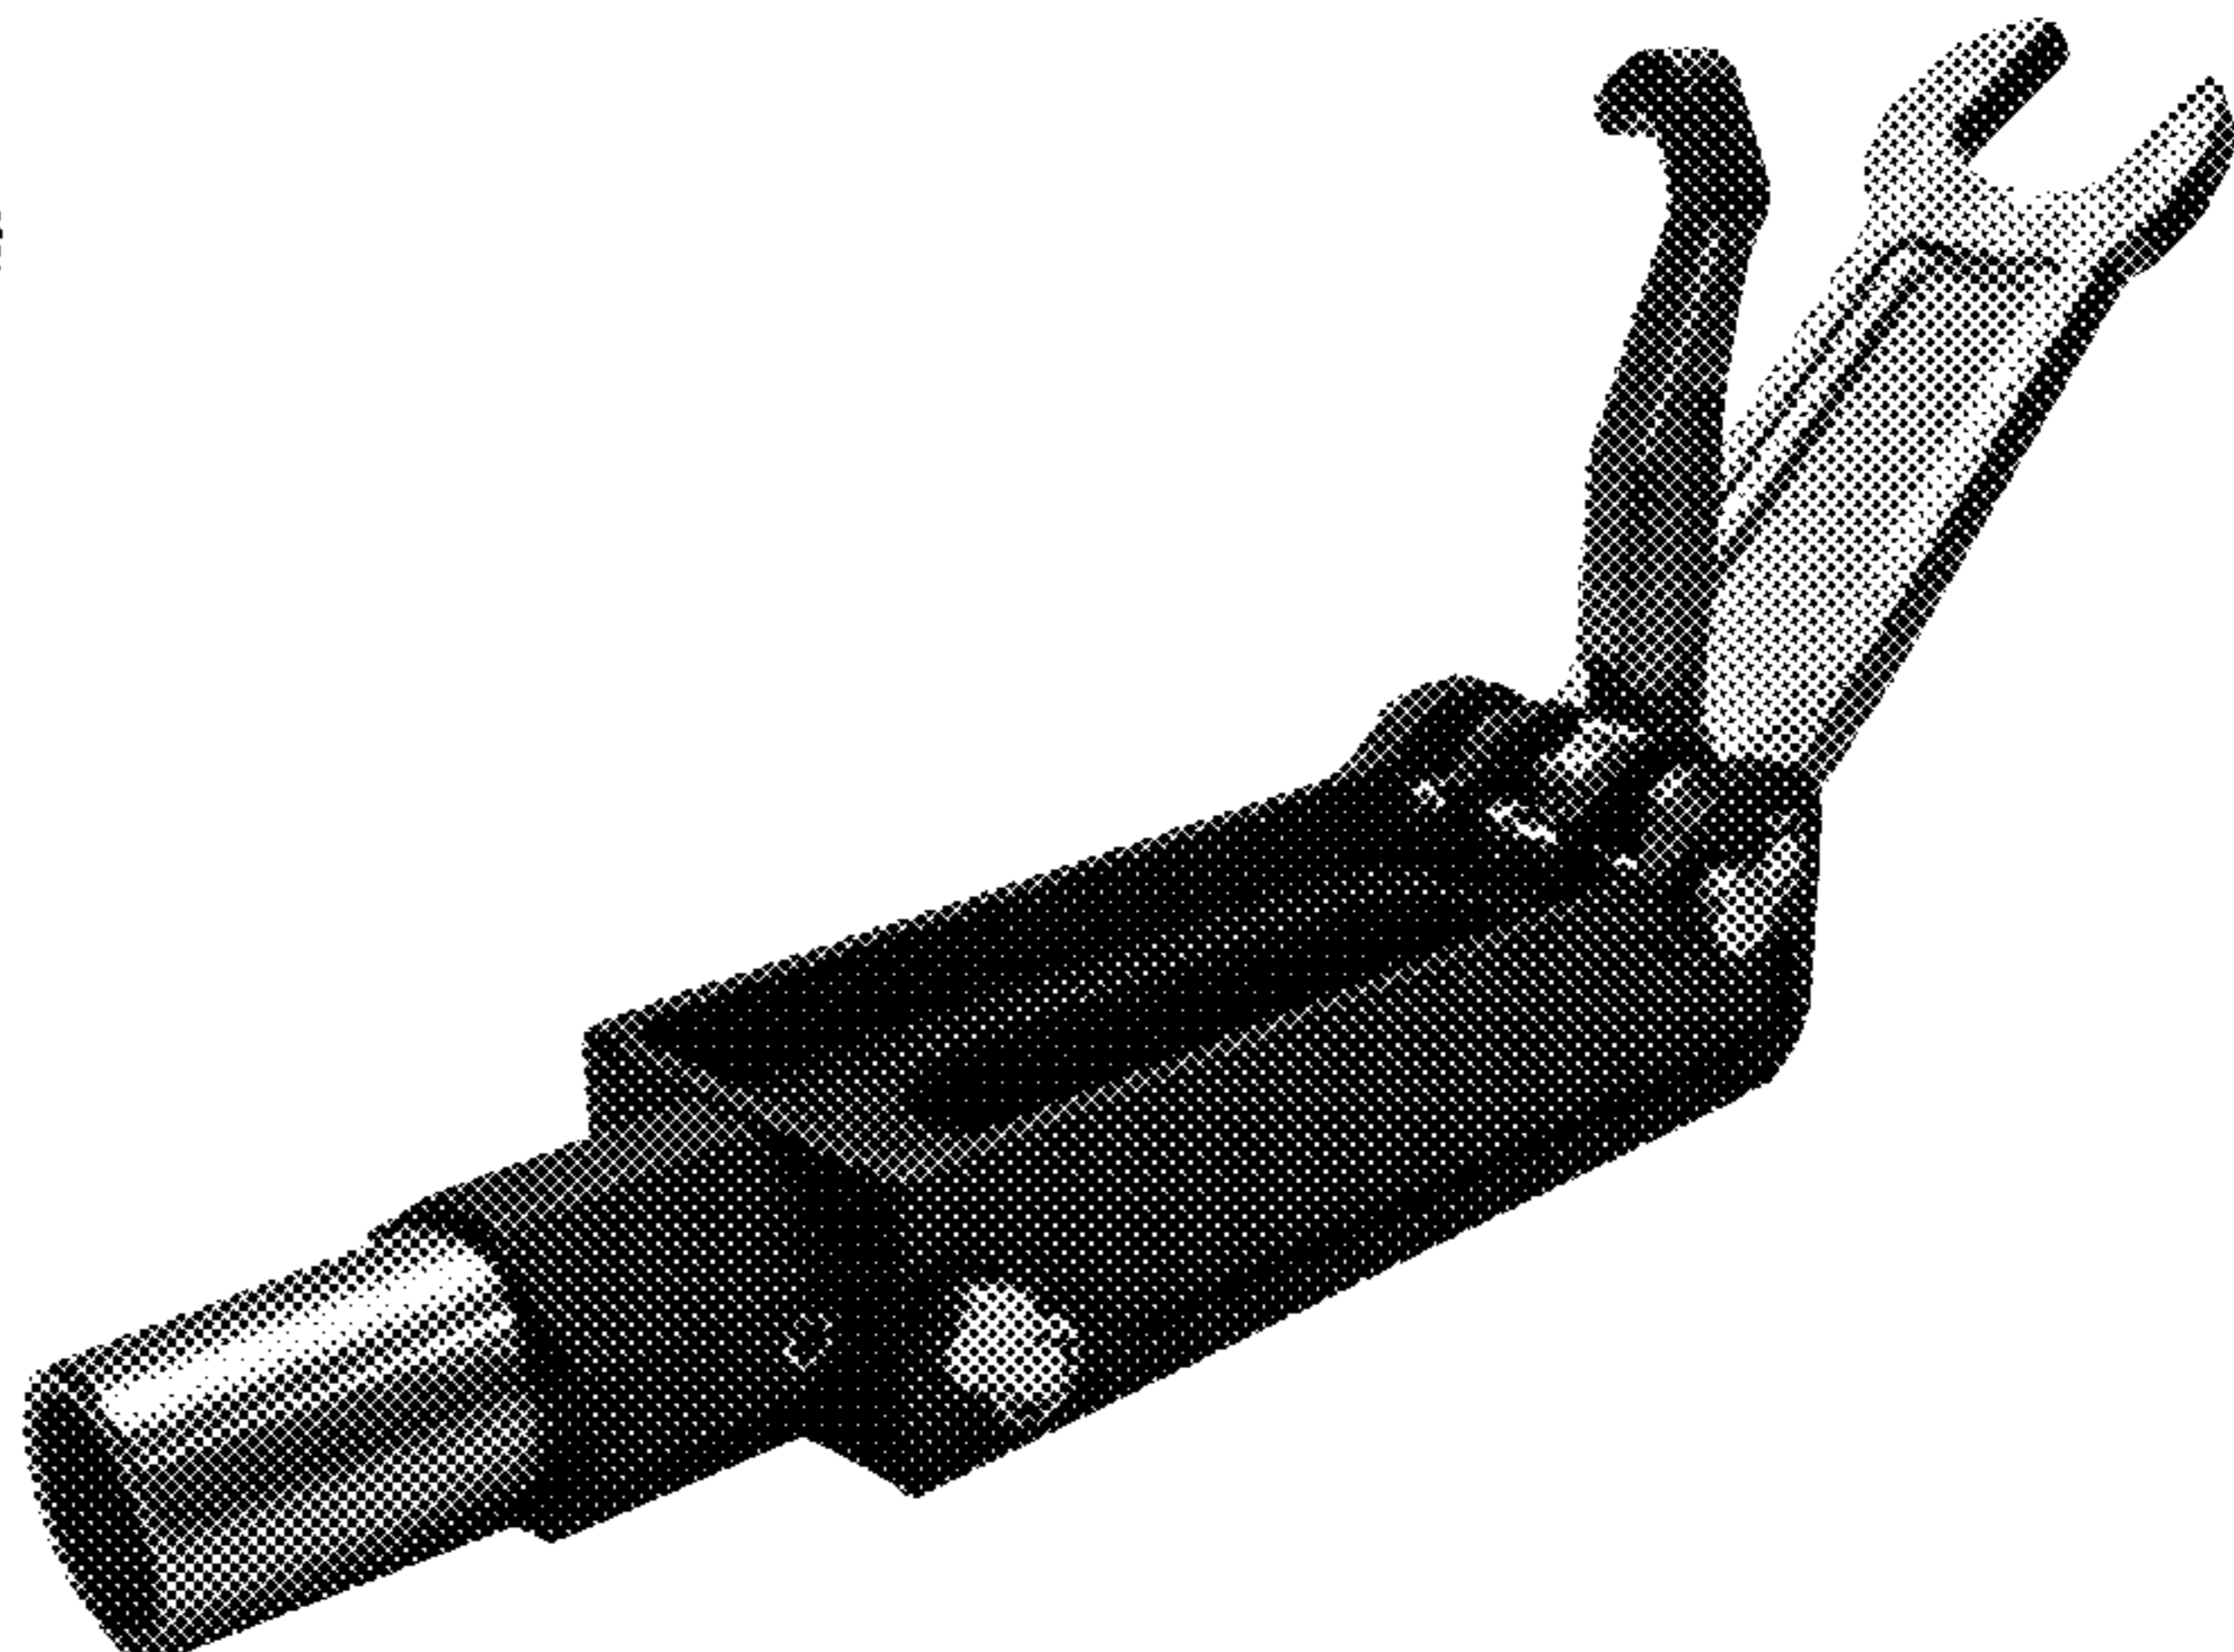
is a perspective view of the second end of the shipboard multi-tool with the bottom side facing up thereof.
